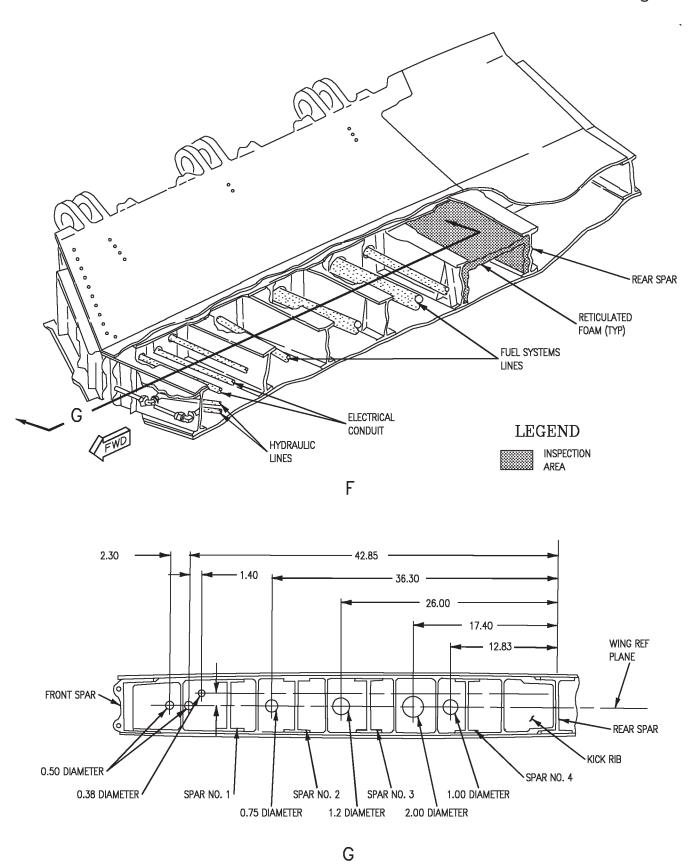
Inner Wing Upper Surface Titanium Splice Fitting Inspection Areas (Sheet 6)
